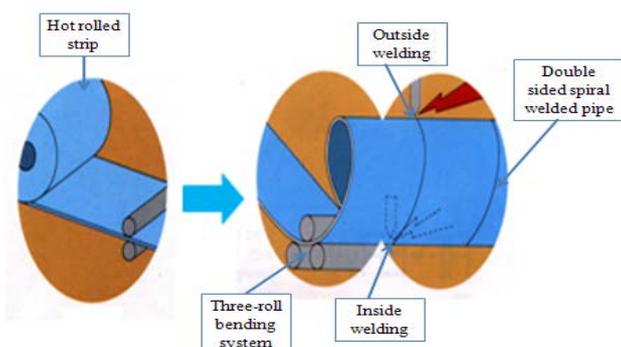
Production of spiral welded steel pipes by SAW
